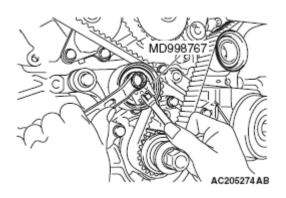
Turning Camshaft Sprocket (Right Bank)
